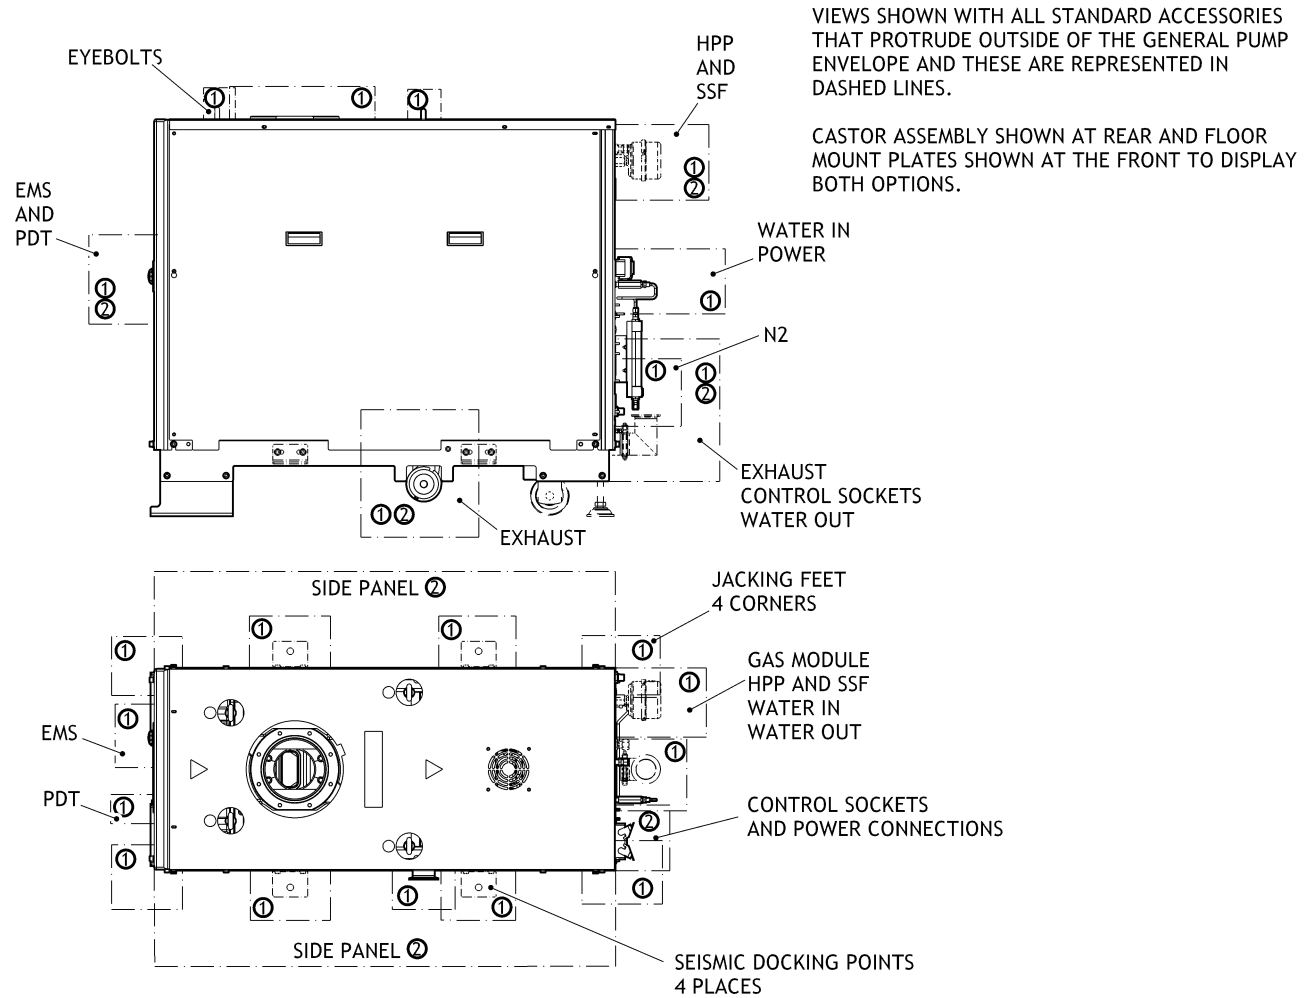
GXS450/4200 installation drawing (Sheet 3)
